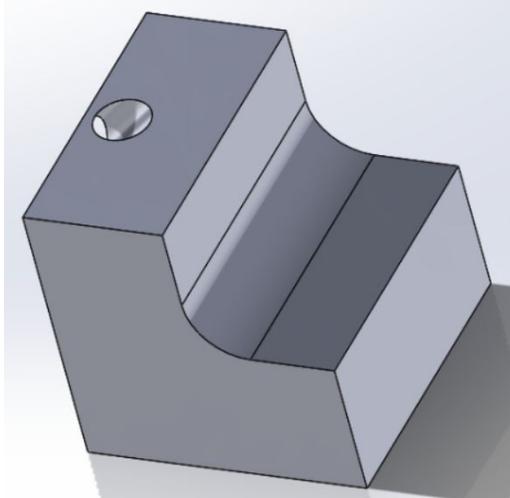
Solid view of MTS Stage adapter. The MTS Stage adaptor places the finger bridge in the line of action of the thumb grip attachment and stabilizes the prototype.
